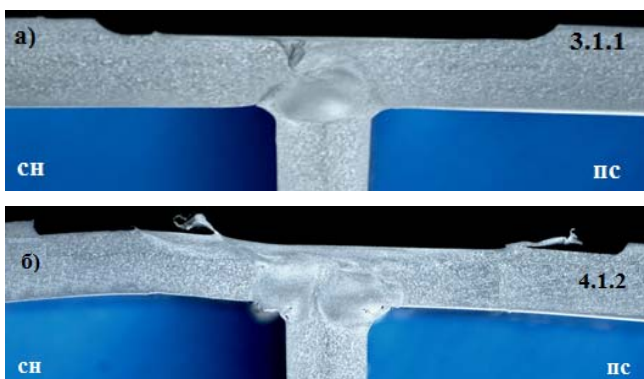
a) single pass weld; b) two-pass weld.
